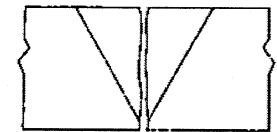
Failure of unreinforced (flushed) butt weld
